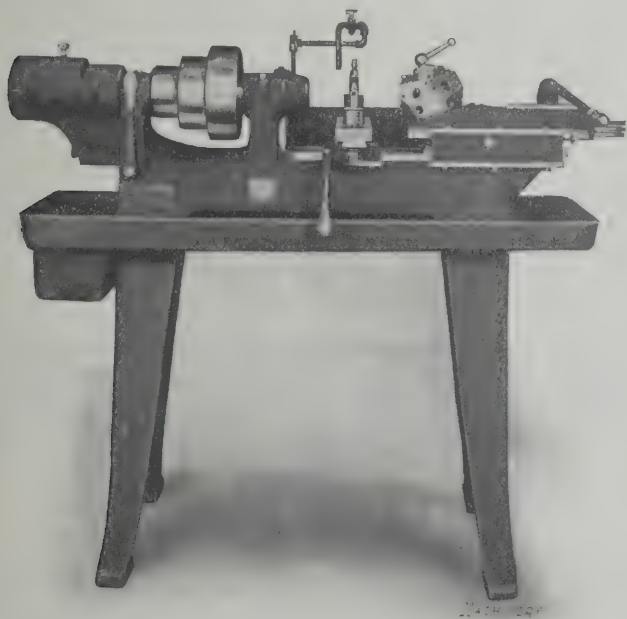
No. 1 Size Tilted Turret Screw Machine
